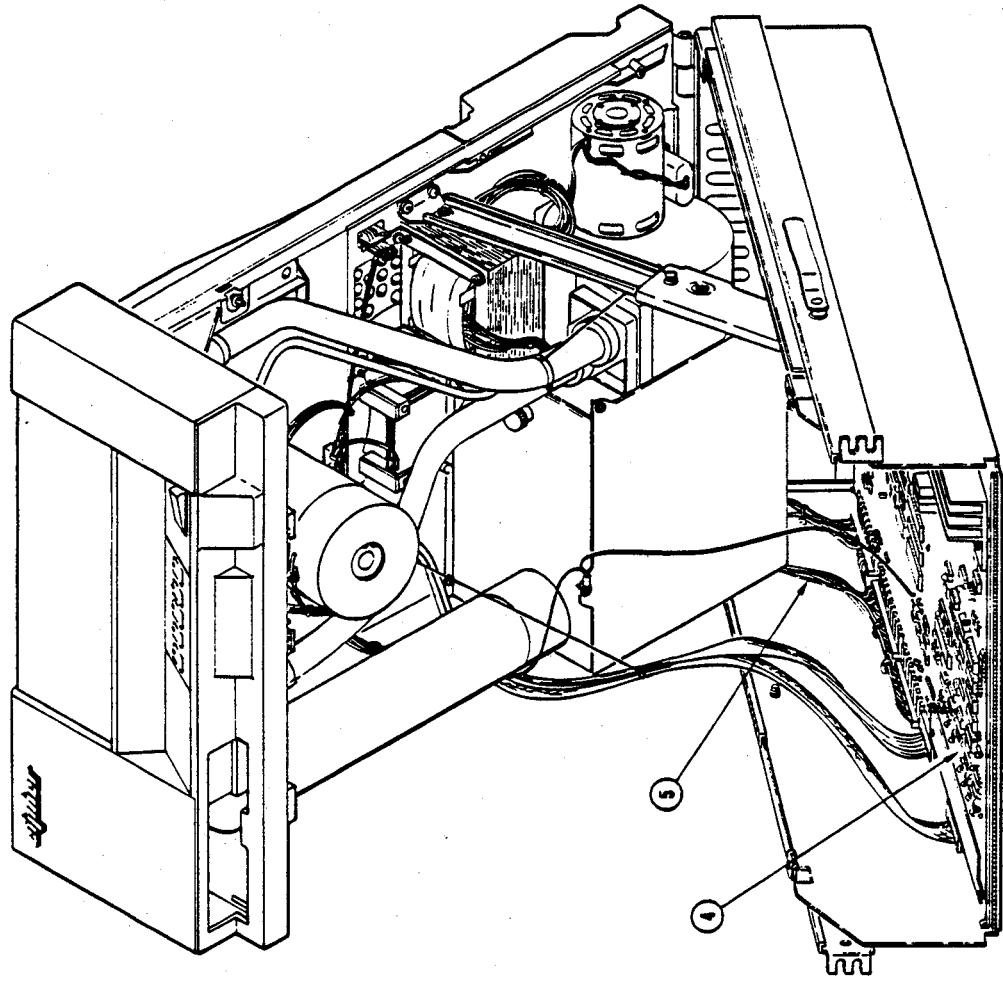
Model F880 Magnetic Tape Streamer Unit (Assembled View)
